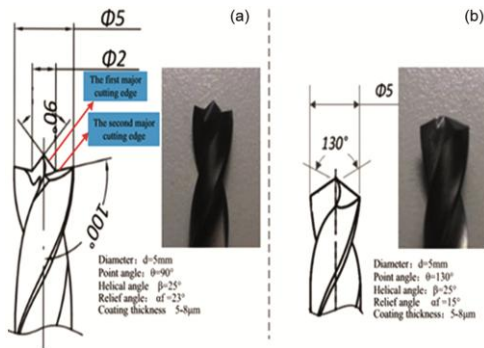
The geometry of twist drill a) Tool A, and b) Tool B<sup>71</sup>.
